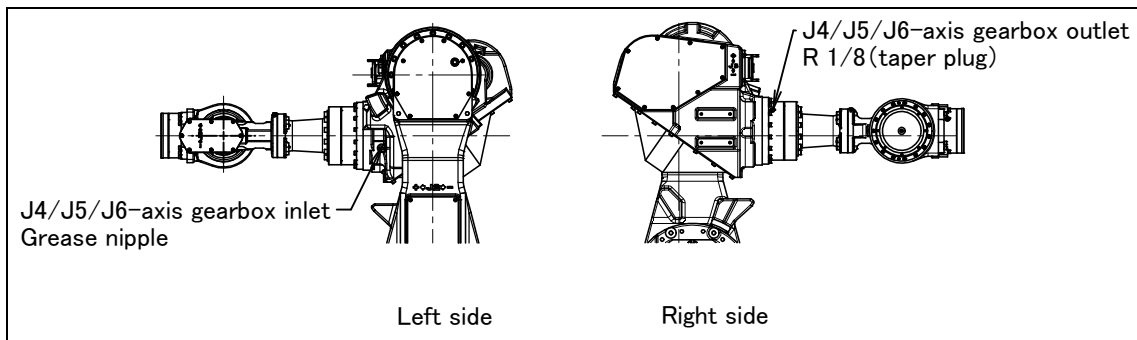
(c) Replacing grease of the J4/J5/J6-axis gearbox (M-710iC/50S)
